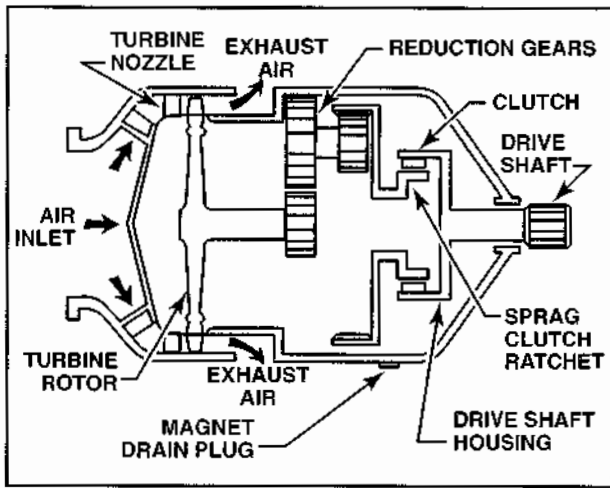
A typical air turbine starter consists of a small turbine assembly, reduction gearing, and a clutch assembly.
